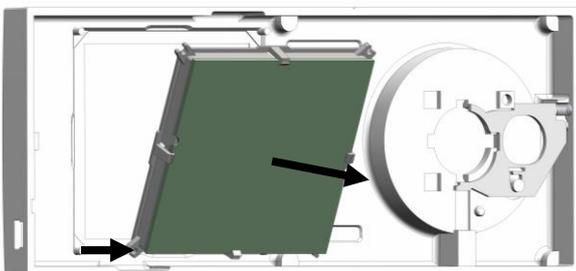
Carefully pull out the keypad sub-assembly toward the back
